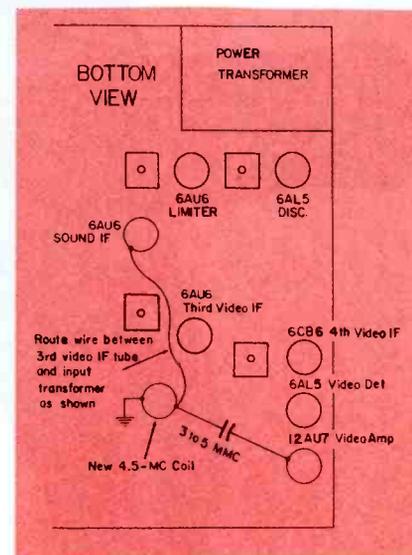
Chassis Layout Showing Location of New 4.5-mc Coil.
